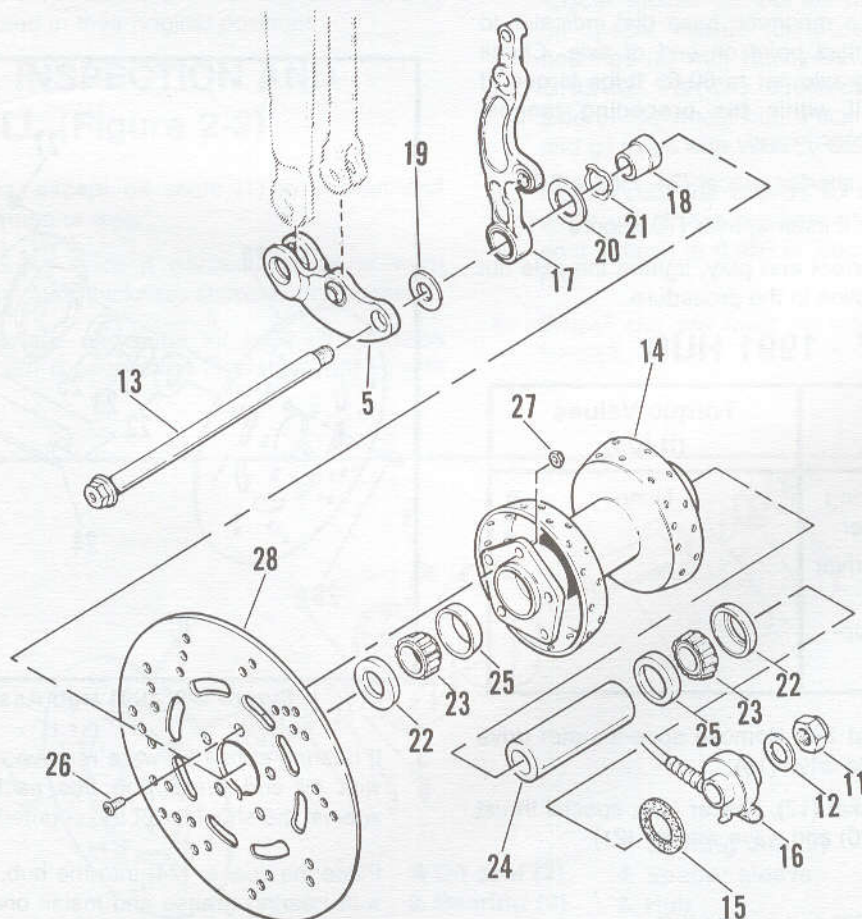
Brake Bracket and Axle Assembly (1991 Hub Assembly)
